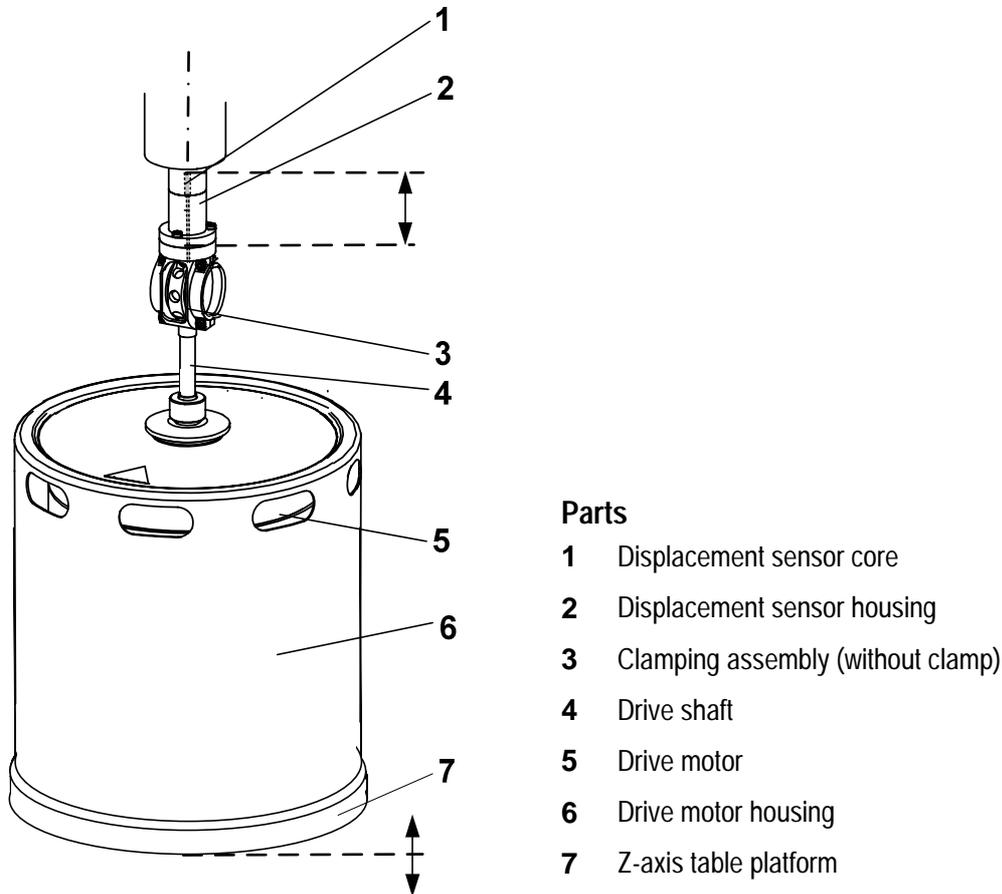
Arrangement of drive motor, z-axis table and clamping assembly. The movement of the z-axis table and the displacement sensor core is indicated by the up and down arrows.
